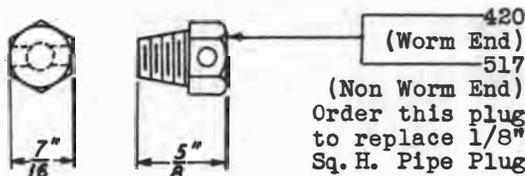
Filling Plug - Hex. H. Pipe Plug (Vented Plug)
